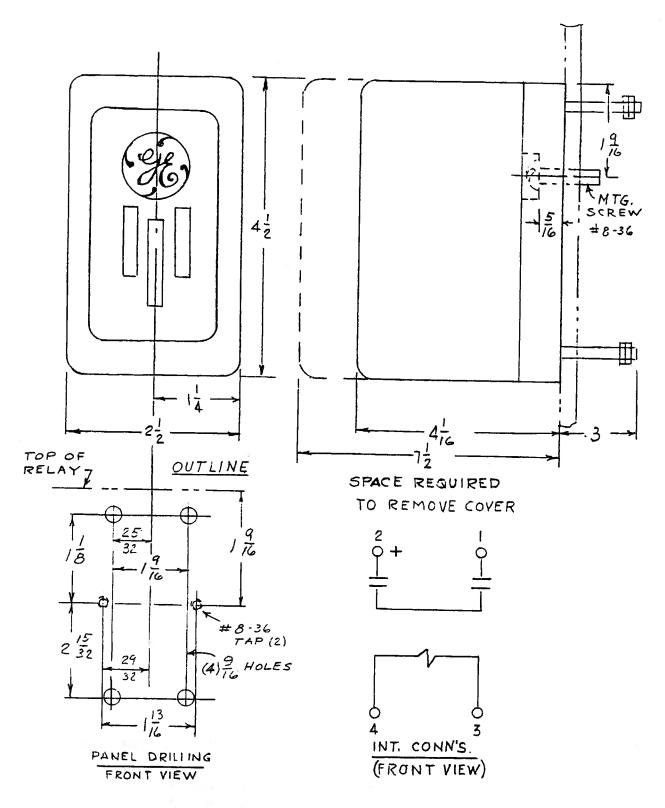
(0178A7177-2) Outline, Panel Drilling Dimensions and Internal Connection Diagram for Relay Type HGA33B.
